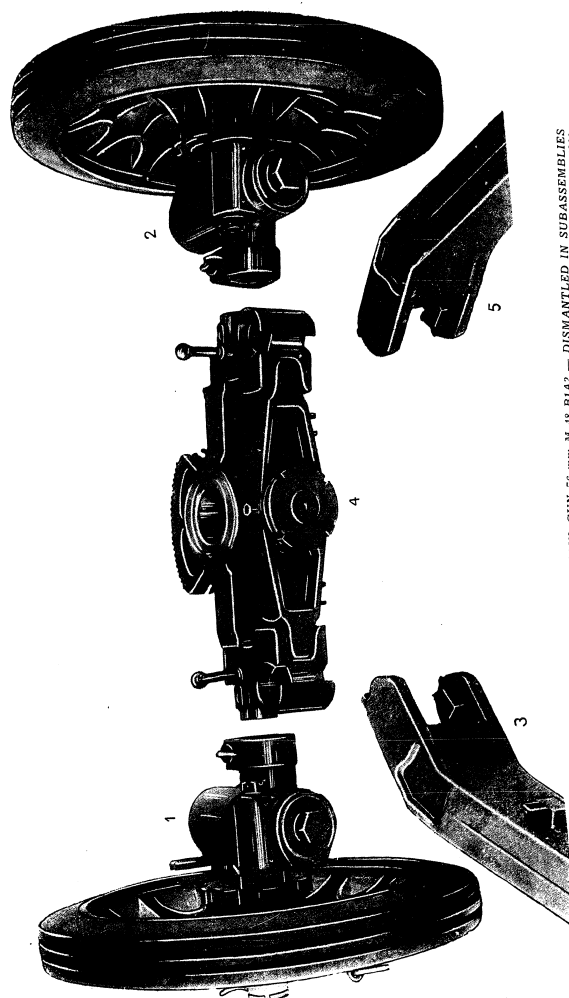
BOTTOM CARRIAGE FOR MOUNTAIN GUN 76 mm M.48 B1A2 — DISMANTLED IN SUBASSEMBLIES
